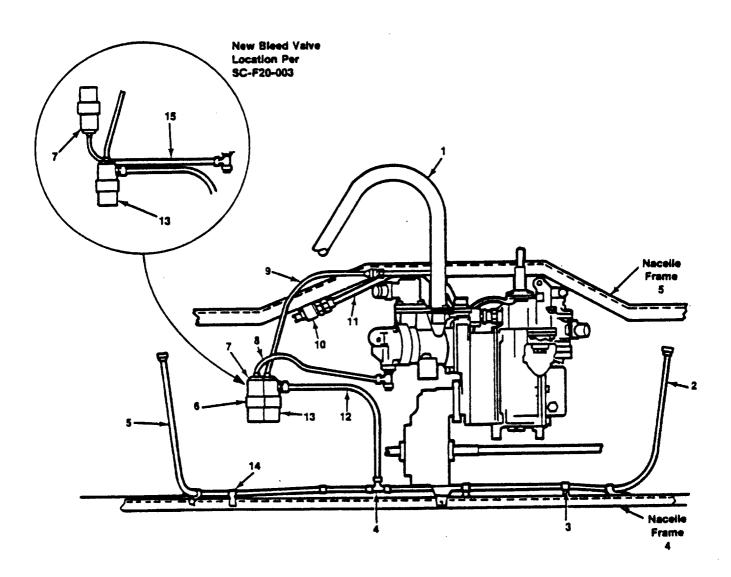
Pneumatic Actuator, Spur Gearbox and Nulling Cable Assembly
